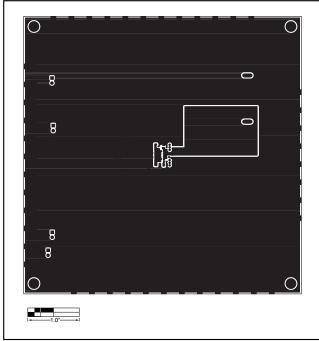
MAX9400 EV Kit PC Board Layout—Solder Side
